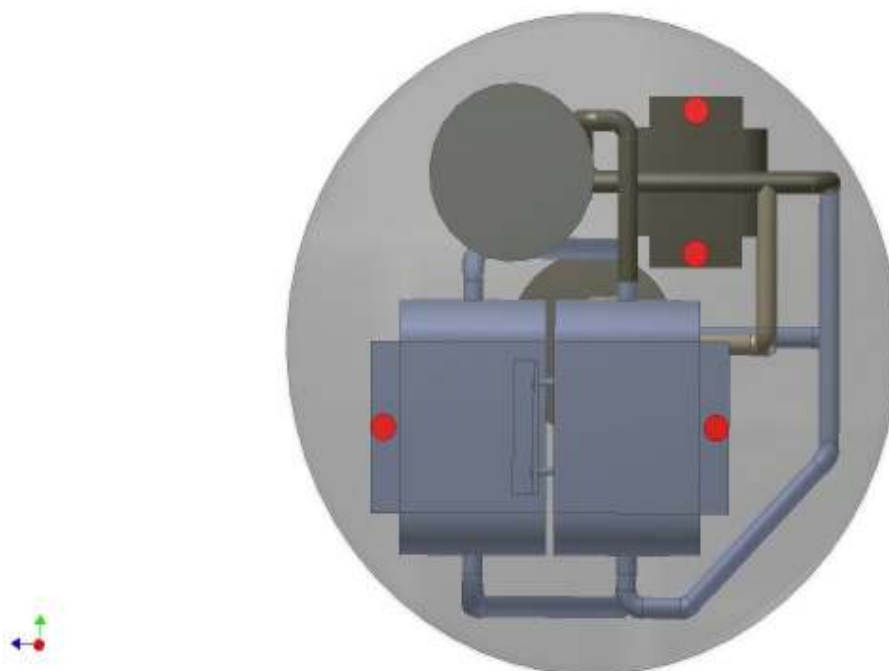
Bottom View of Nitrogen Liquefier Assembly
